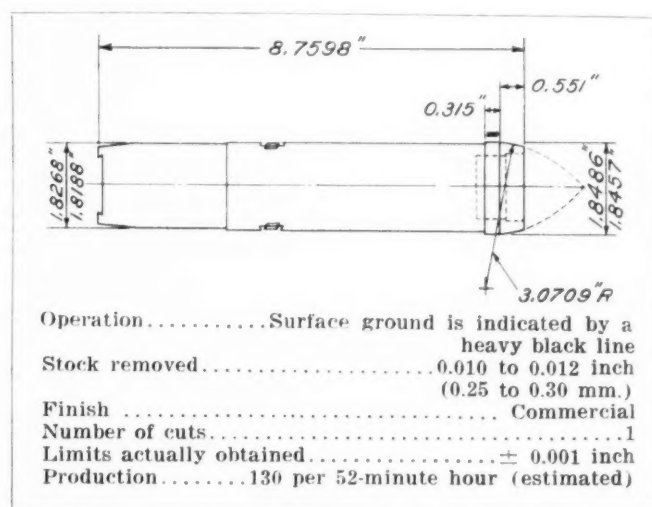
Data on Finishing the Bourrelet of 47-millimeter Shell
